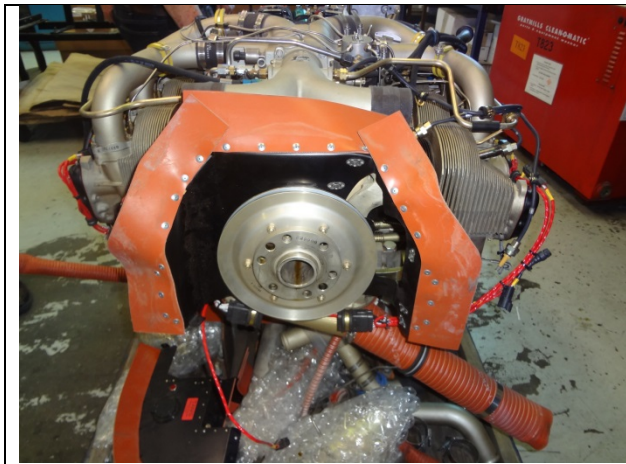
Front Side of Engine and Propeller Flange As Viewed
